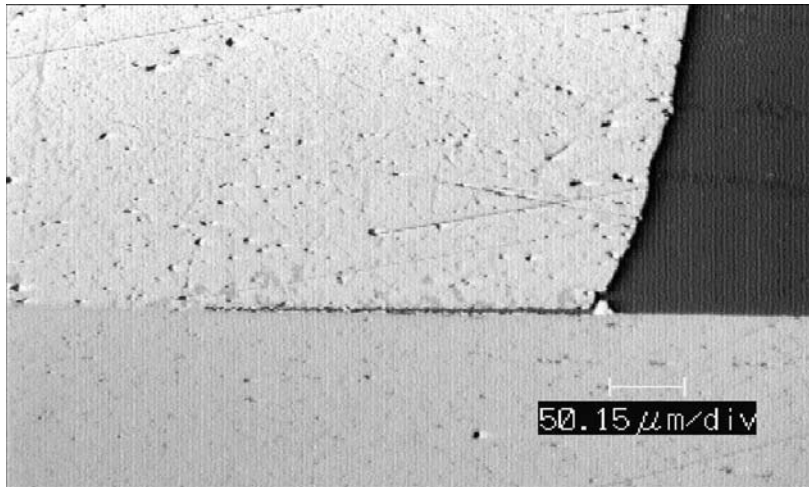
Crack in Sn-3.5Ag-5Bi BGA solder joint (C2).
